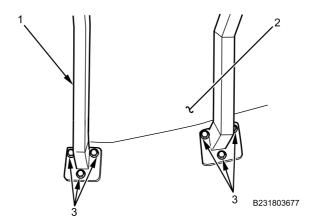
Floor Seat Bracket Lower Mounting Bolts.
